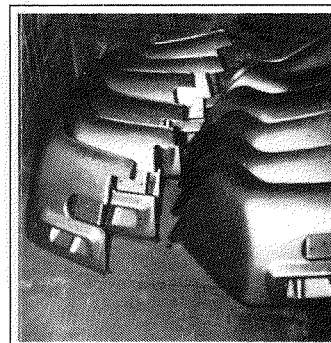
The end result! Completed front quarter valances prior to cleaning and painting.
